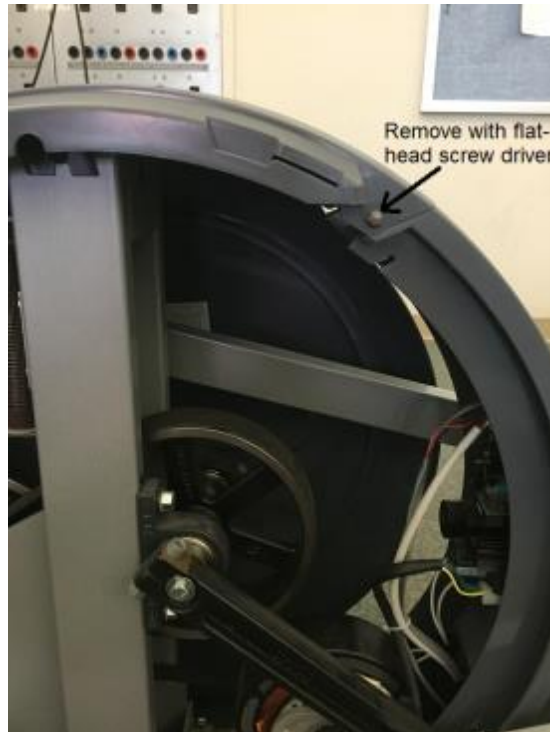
Screw Location for rear elliptical housing top panel. Second screw not shown in figure. The second screw mirrors the screw shown in figure [11]
